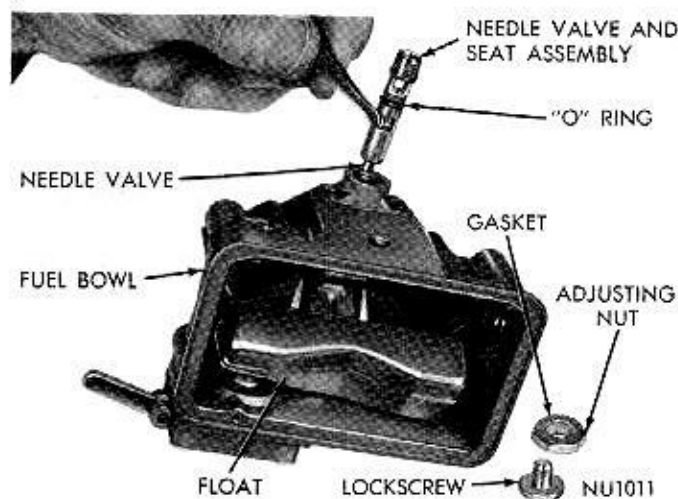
Removing or Installing Fuel Inlet Needle and Seat
